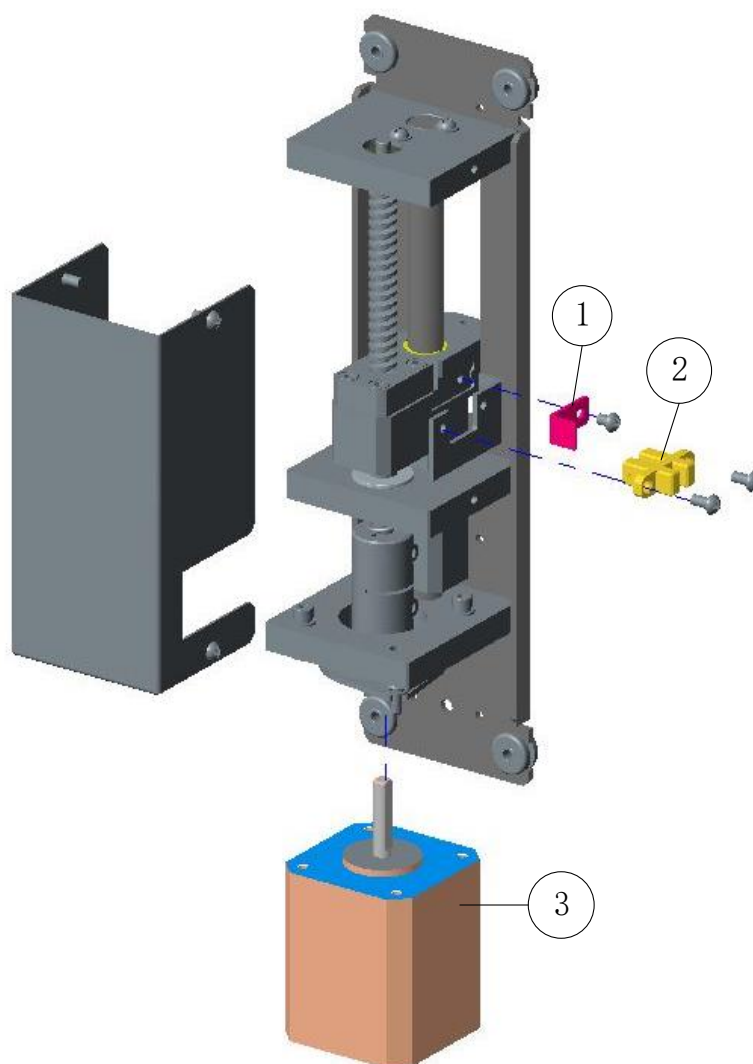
Exploded View of Wash Injector Drive Assembly
